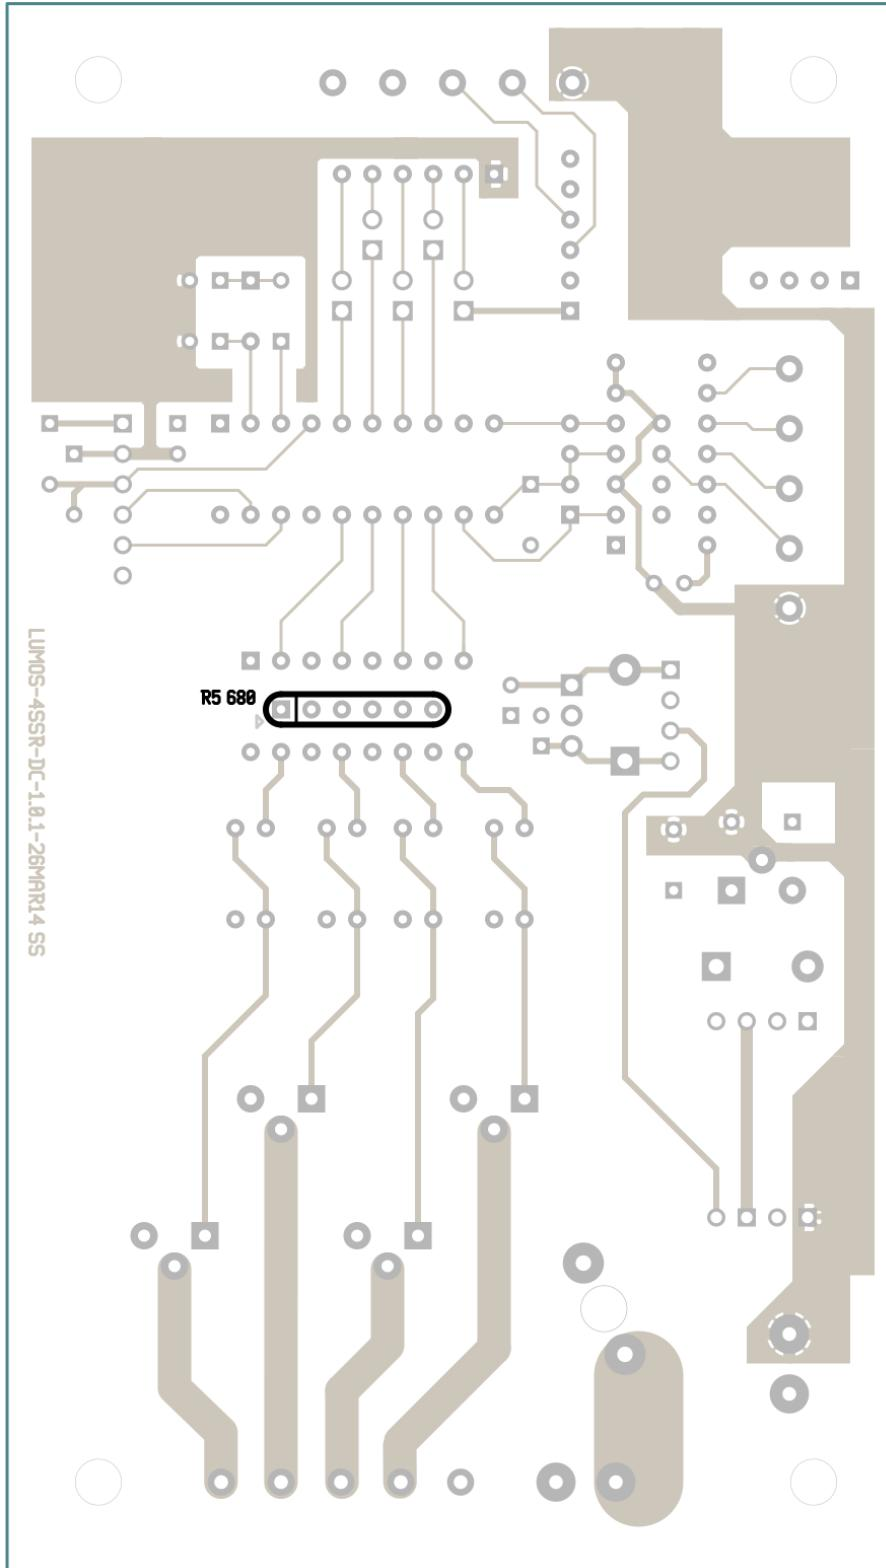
Lumos Board Parts Placement (Reverse Side)
